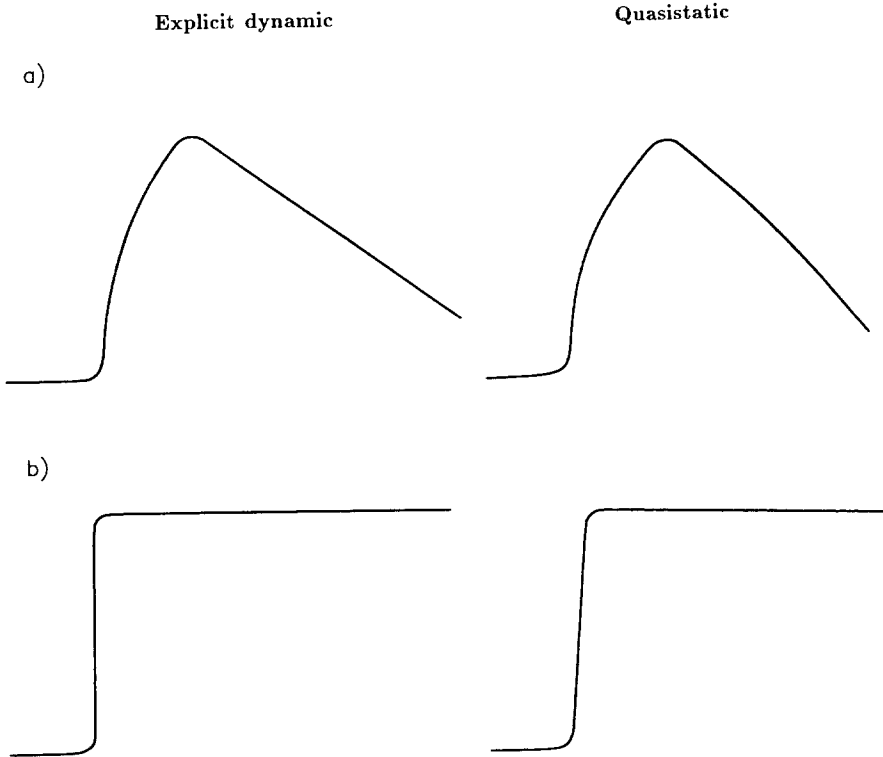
2D draw bending – deformed shapes after springback: (a) blankholding force 2.45 kN; (b) blankholding force 20 kN.
